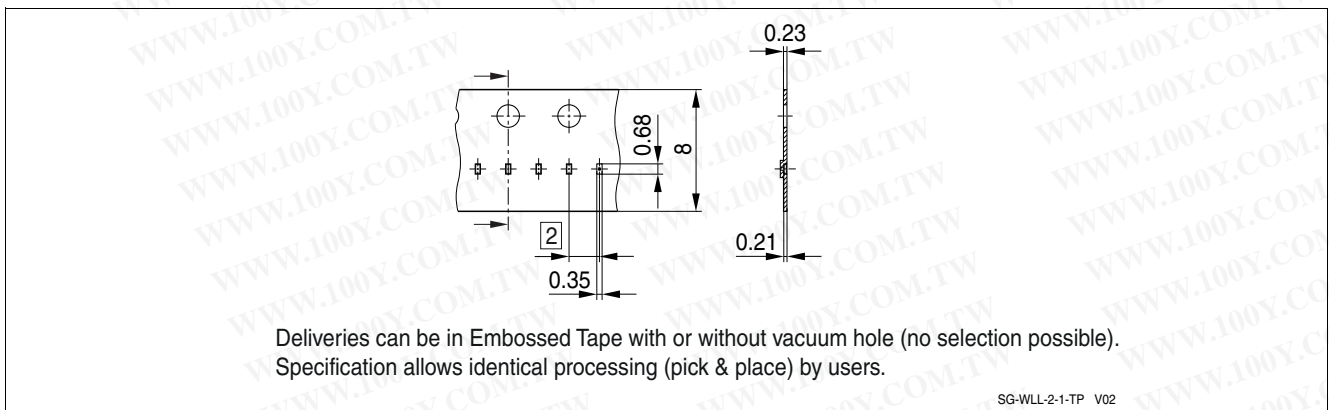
WLL-2-1 Packing (dimension in mm)
